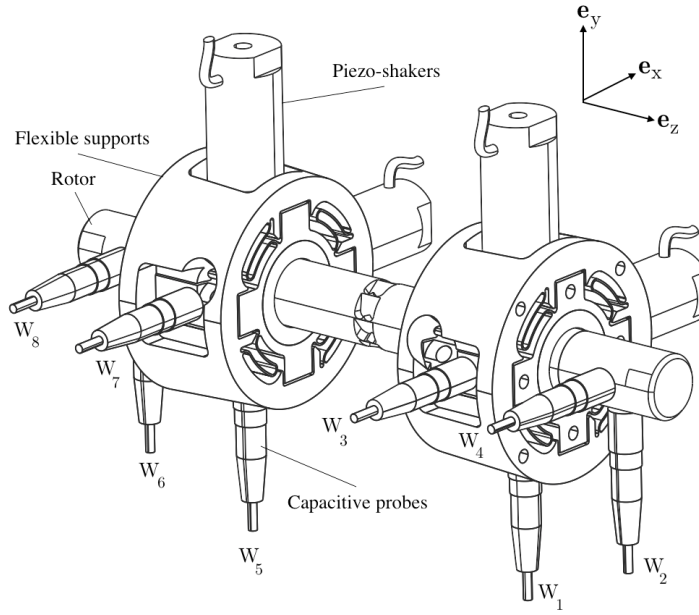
Partial assembly showing the rotor mounted in the flexible supports equipped with piezo-shakers and the 8 capacitive sensors, denoted W_1 to W_8
